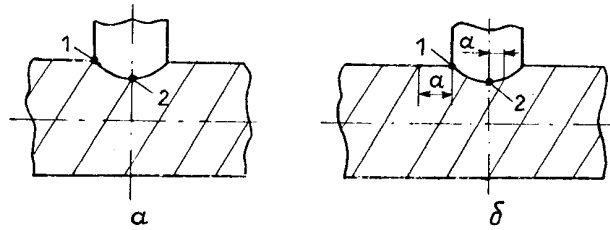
Welding of nozzles into pipelines with spiral welds:
